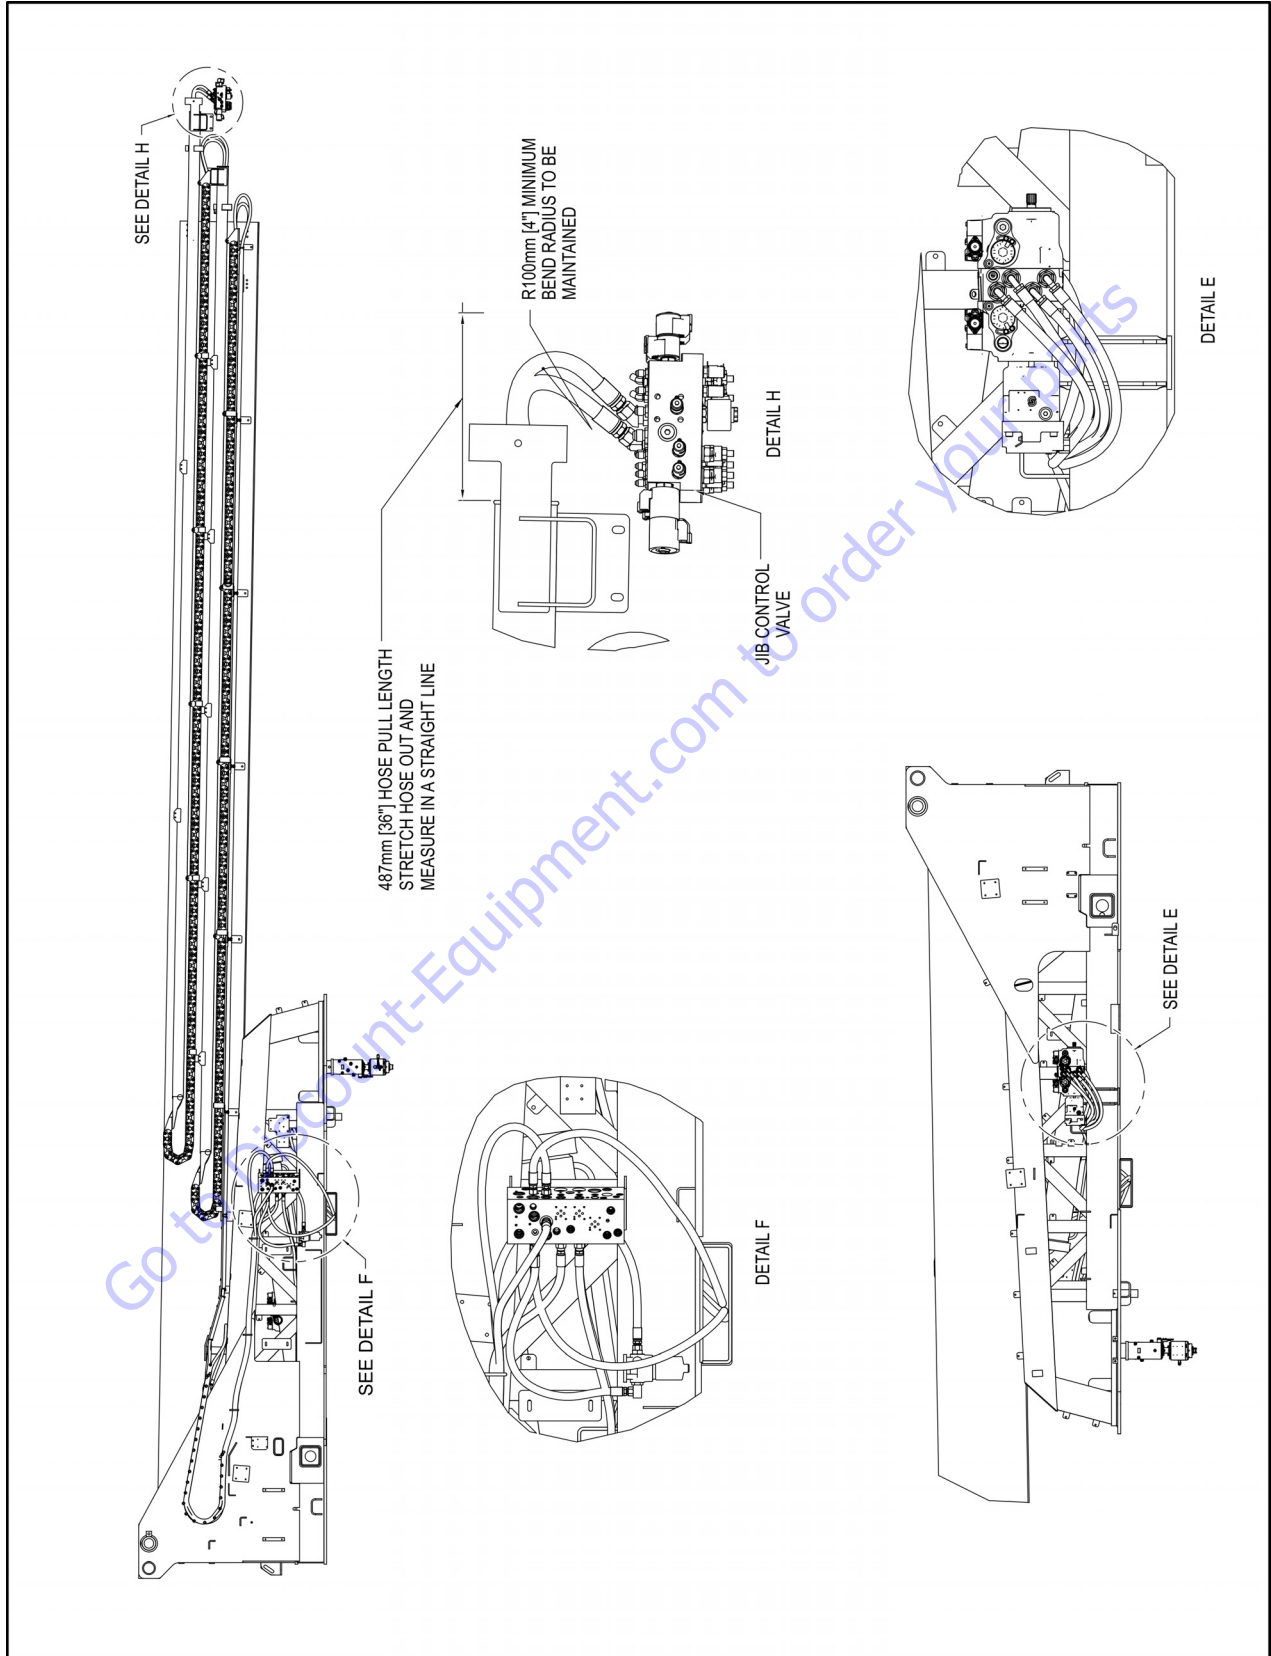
Hydraulic Hose Installation - Sheet 1 of 8
